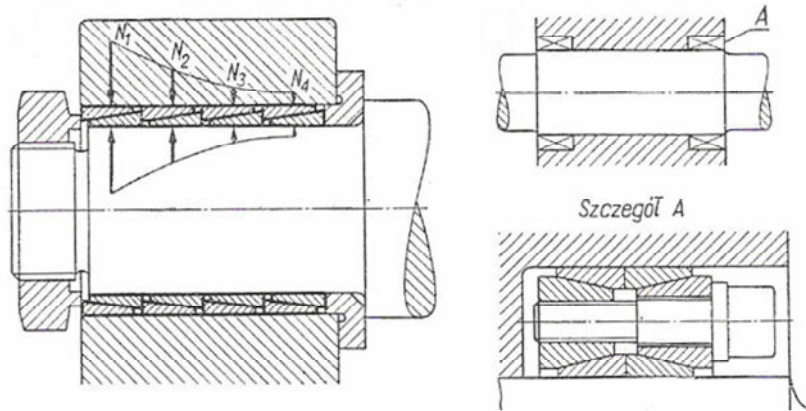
Tapered rings in shaft-hub connections [10]. Legend: szczegół = detail
